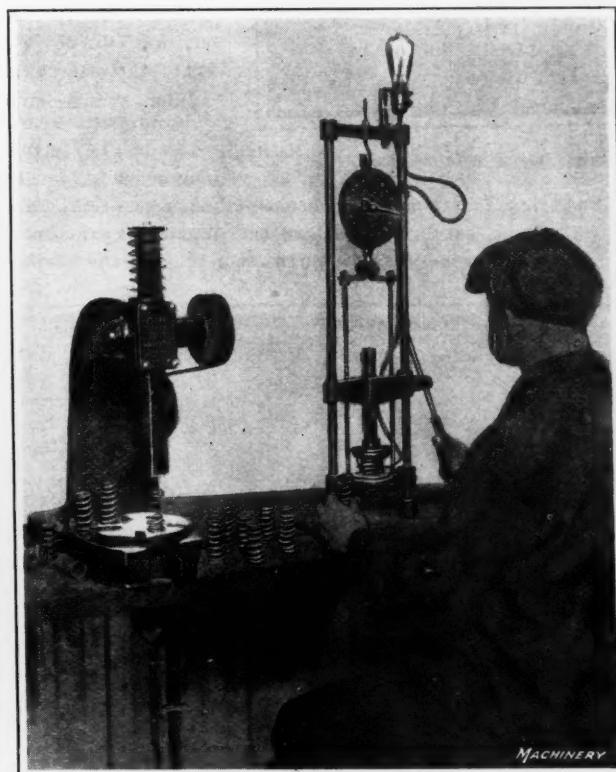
Apparatus used for setting and "weighing" Valve Springs
